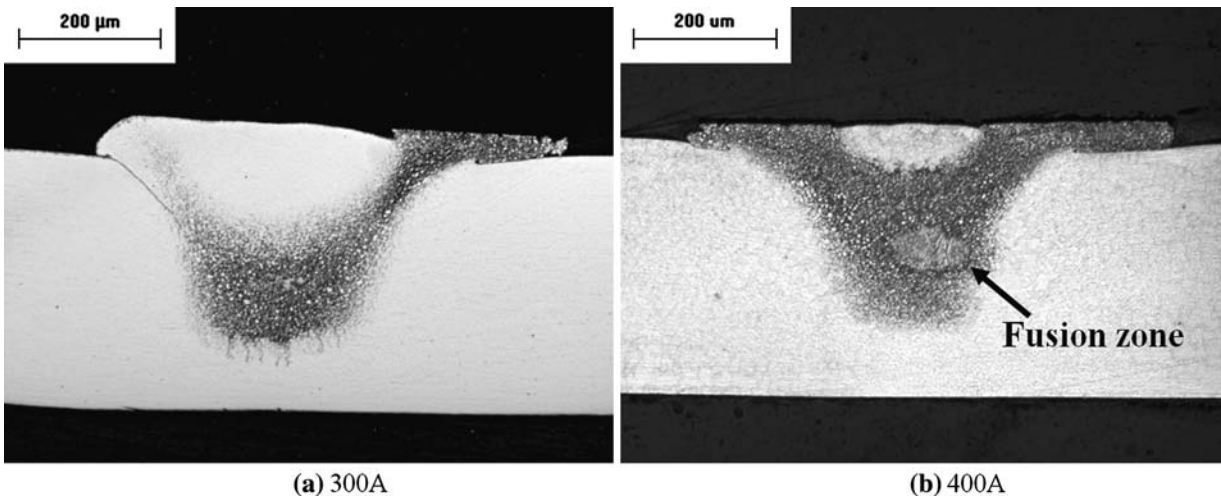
Weld cross section for RMW made using 5 kg-f welding force.
